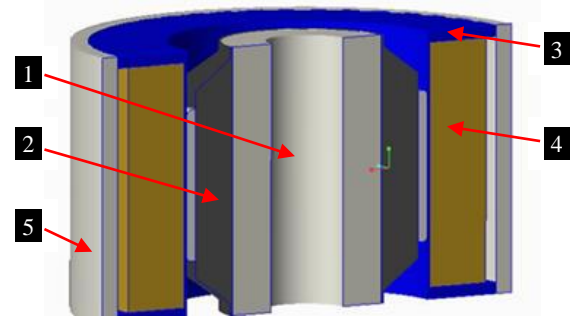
Cross-sectional drawing of the MRE testing design; (1) MRE bushing; (2) MRE; (3) coil bobbin; (4) electromagnet coil winding; and (5) housing.
